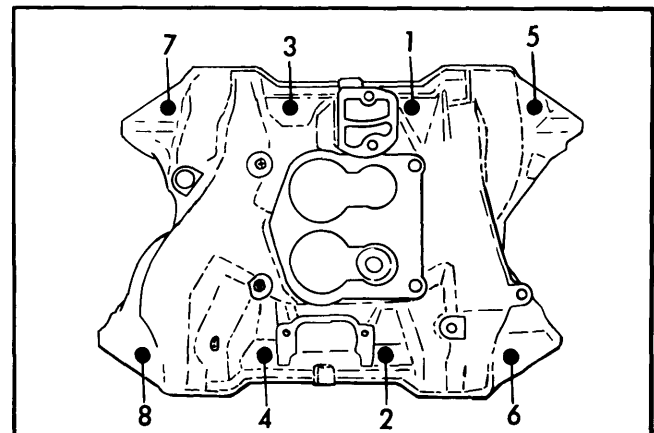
400" & 440" Engine Intake Manifold Tightening Sequence
